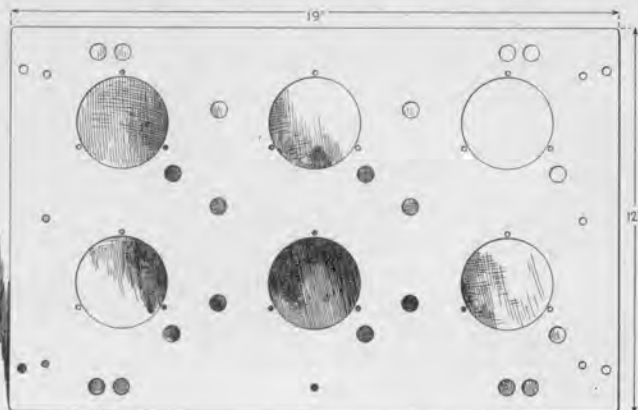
A universal exciter unit for 5-band amateur operation as constructed by the editorial staff of QST. Everything is mounted on a TYPE 661-B Unit Panel and a TYPE 661-L End- and Base-Plate Assembly. Using the panel upside down as the designer did here in order to get his switches at the bottom is all right, if the assembly calls for no meters!
